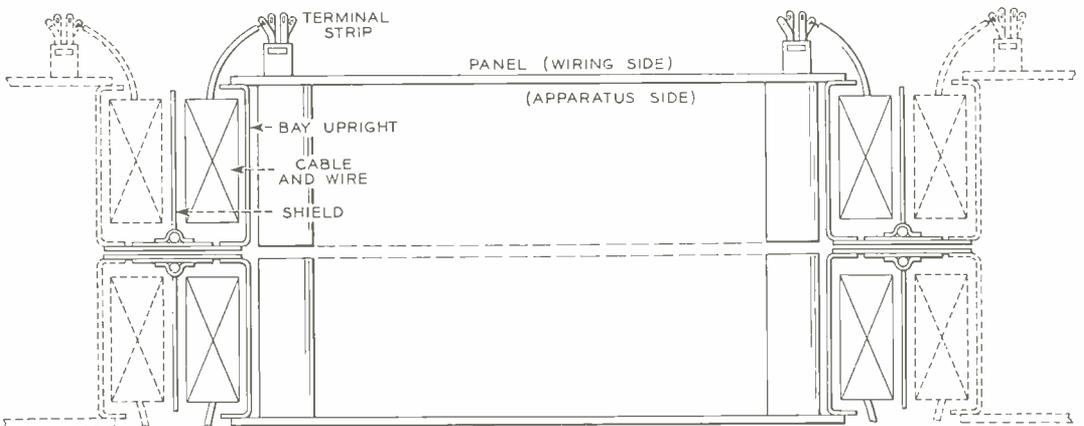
Cross section of the new duct type bay arranged for back-to-back mounting.
